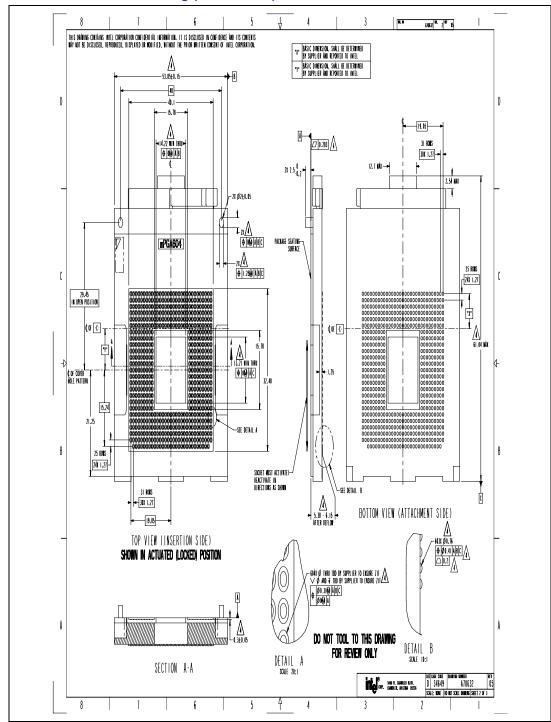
mPGA604 Socket Drawing (Sheet 3 of 3)
